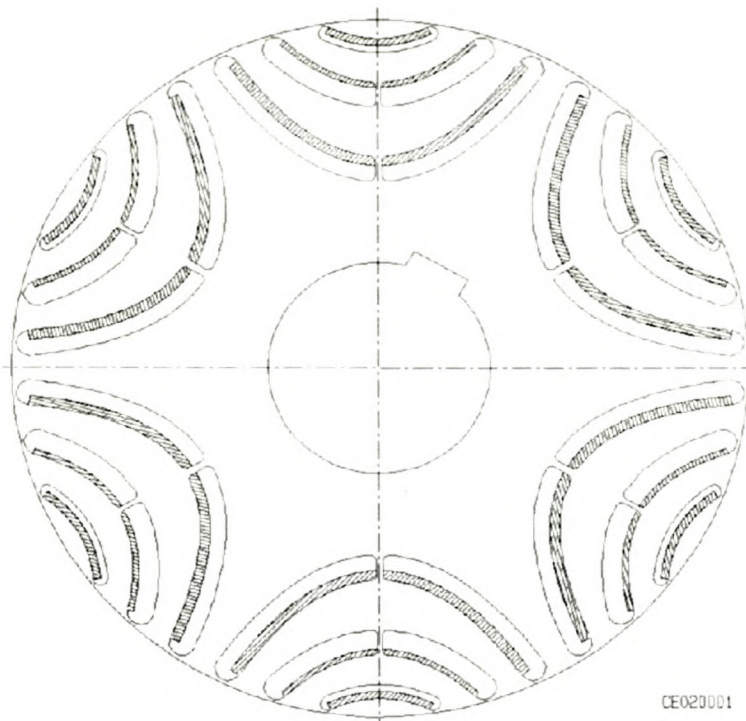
Rotor cross sectional drawing of PM-assisted reluctance rotor
